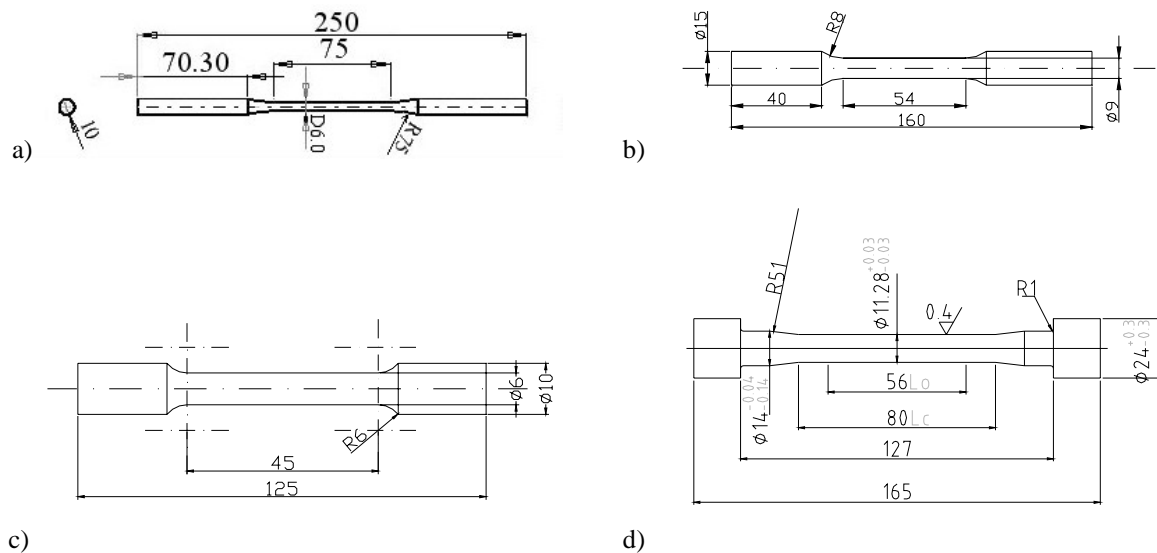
a) Tensile bar for HPDC; b) for gravity die-casting; and c) for investment-casting; d) machined sand-cast tensile sample.
